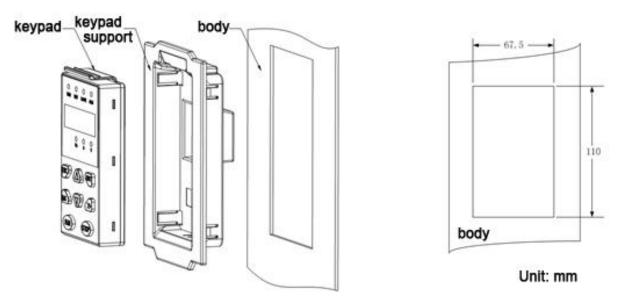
Keypad support installation diagram and control cabinet processing dimensions
